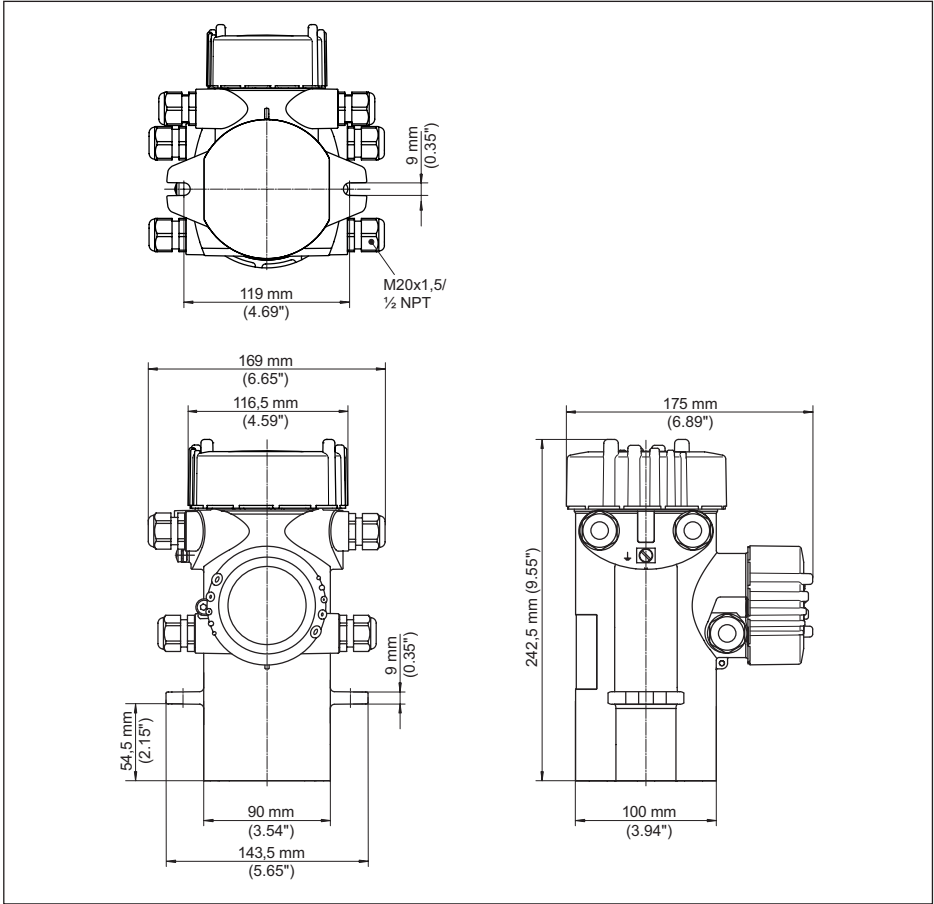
Aluminium housing or stainless steel housing (precision casting)
